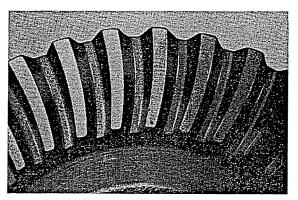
Fig. B. Incorrect tooth contact (pinion too far away from bevel gear shaft centerline)
